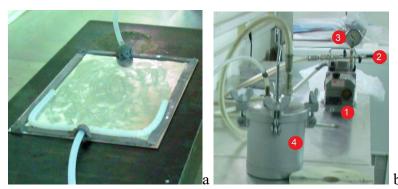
Experimental layout (a) mold with fabric, vacuum bag and in/out pipes (b) vacuum pump (1), regulating valves (2), manometer (3), resin trap (4).
